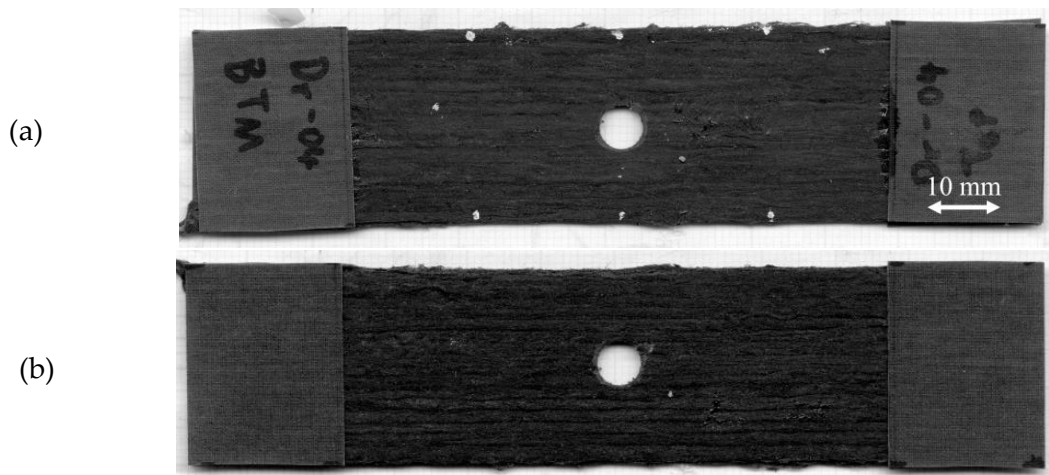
Drilled sample on three layers 3D printed part: (a) top side; (b) bottom (bed) side.
